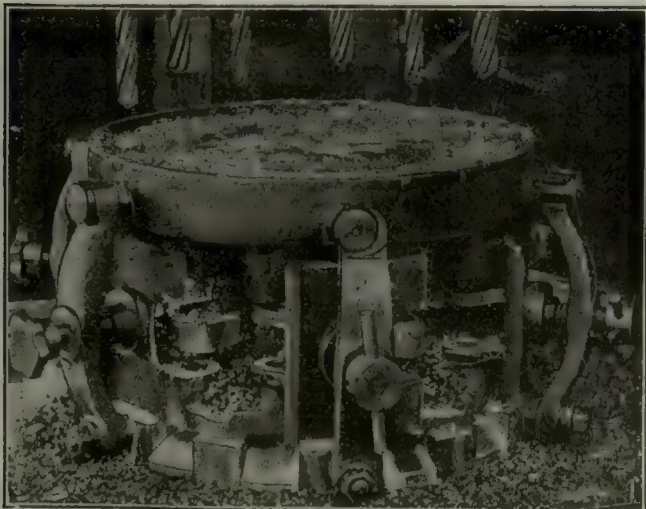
DRILLING JOINT HOLES IN TRACK PAD
